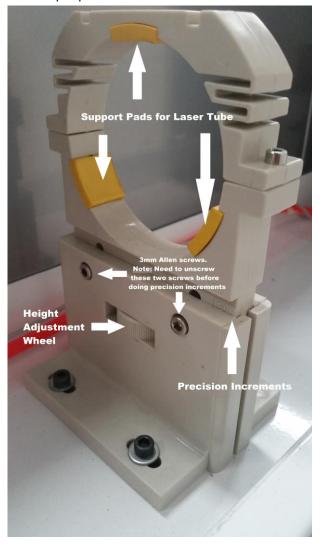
Tube Bracket for LS/HP Industrial Series Machines.
